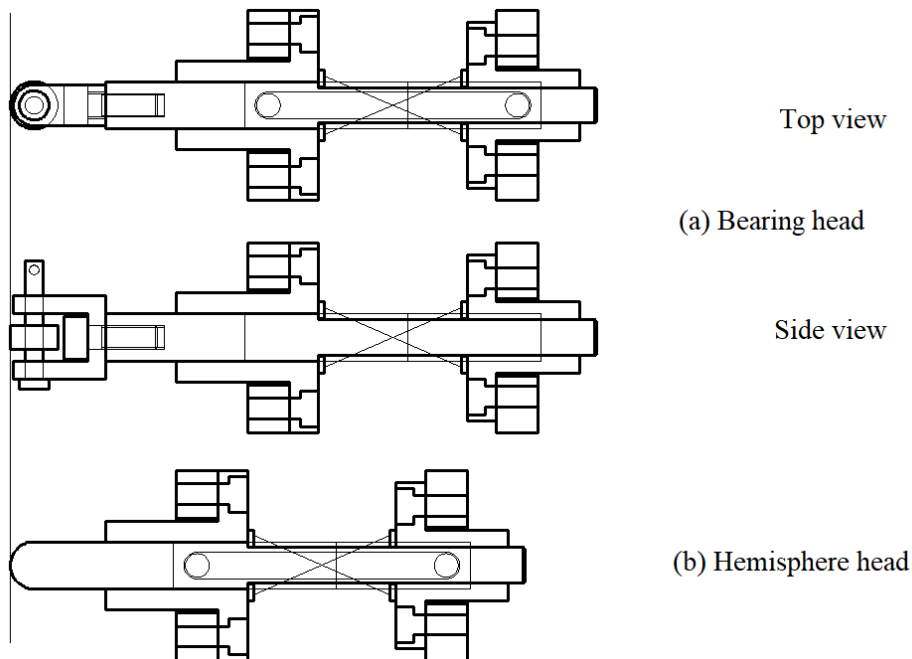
Two roller head designs: (a) bearing head, (b) hemisphere head.
